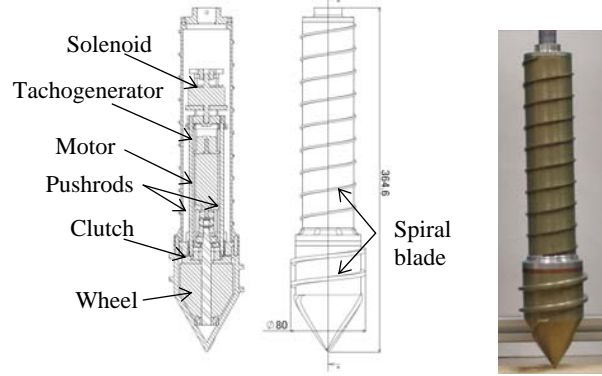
Schematic drawing and picture of Prototype 1 of STSM
